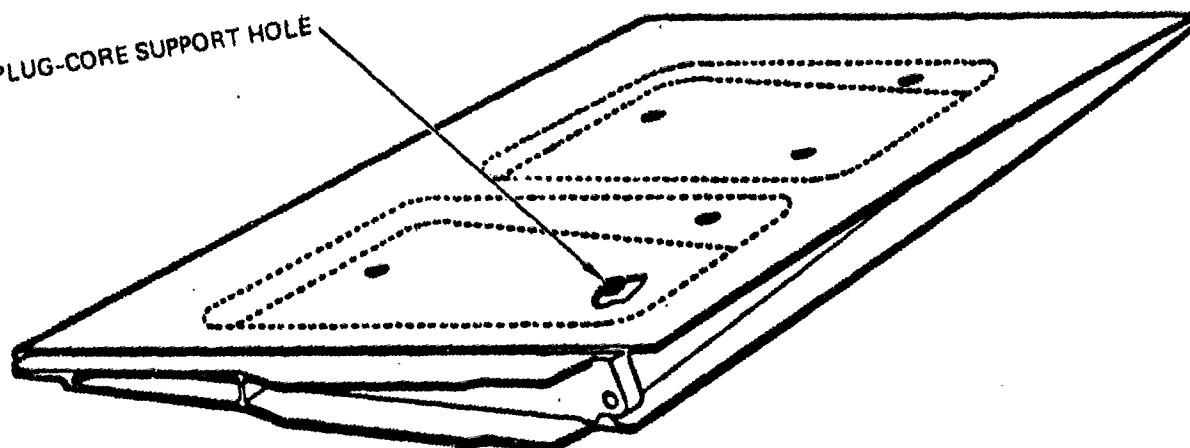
LEADING EDGE EXTENSION CASTING DESIGN ALTERNATE NO. 3:
